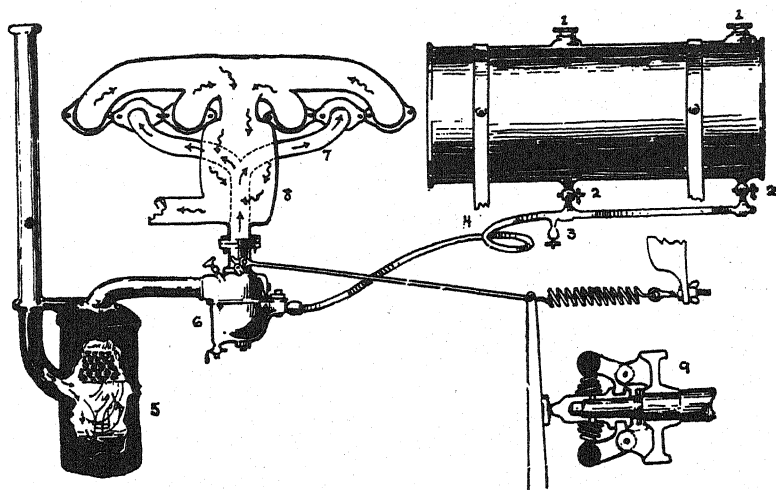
Parts of the fuel system. 1—Fuel tanks. 2—Fuel tank valves. 3—Sediment bulb. 4—Fuel pipe. 5—Air cleaner. 6—Carburetor. 7—Intake manifold. 8—Heating device. 9—Governor.
